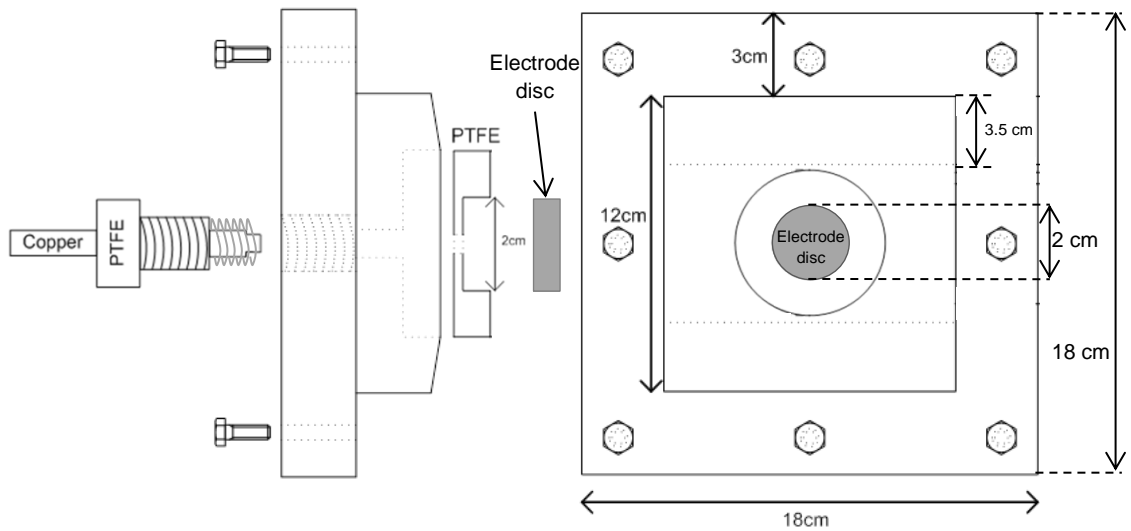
Drawing of Electrode holder viewed from the side and the front, with electrical connection screw at the back of the electrode
